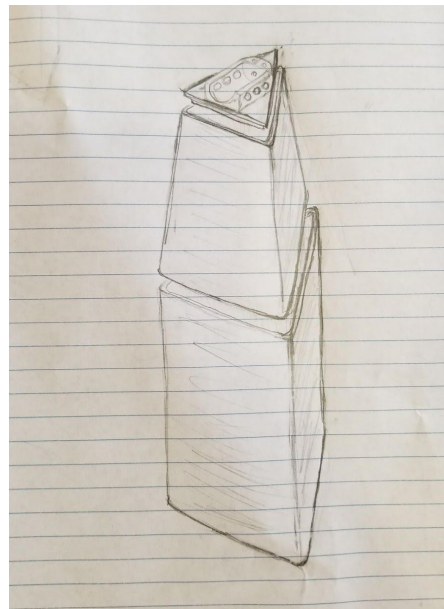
Pictured above is the isometric view of exploded sketch of the tower.
